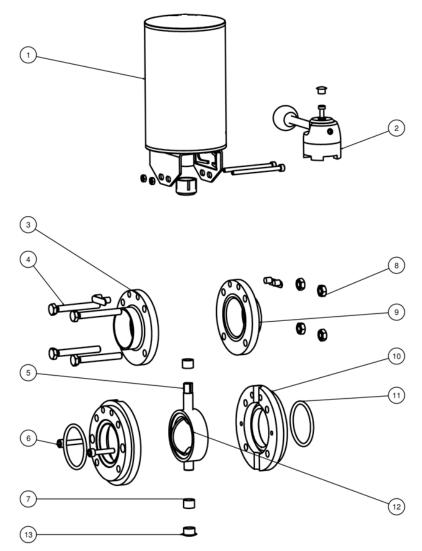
Disassembly butterfly valve type SV04 with pneumatic actuator PAMS
